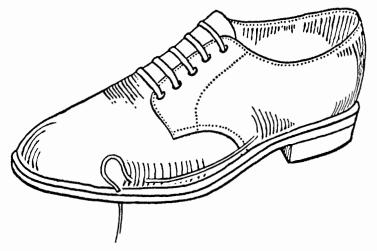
Thread passed on upper side through first hole and brought out through second hole.
